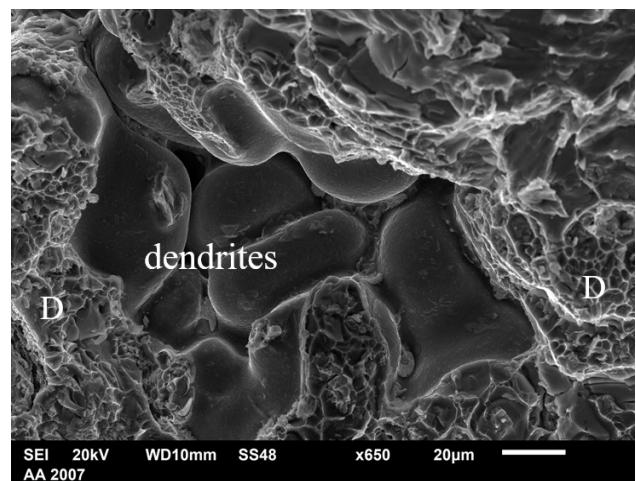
Fracture surface of the tensile specimens showing dimpled fracture (areas D) and exposed dendrites.
